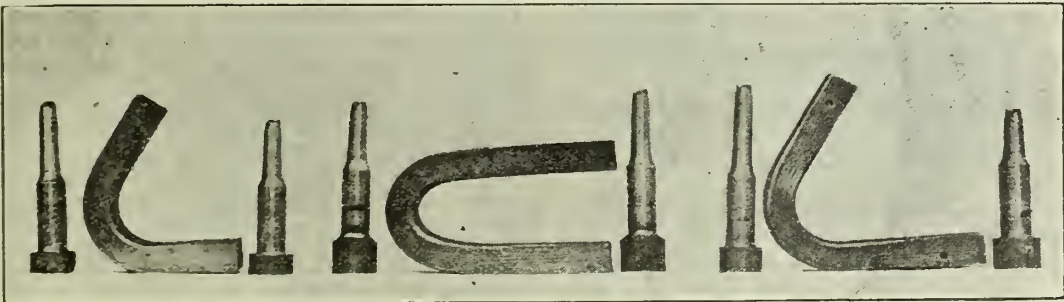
A NUMBER OF STANDARD TENSILE AND COLD BEND TEST PIECES.
